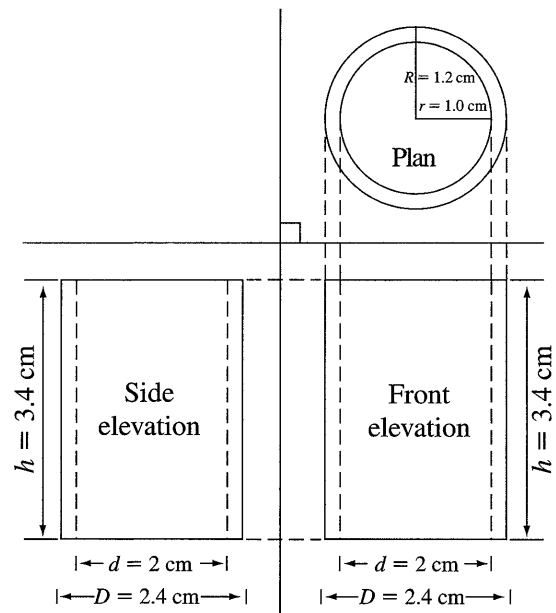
Plan, front elevation and side elevation of cylindrical tube
